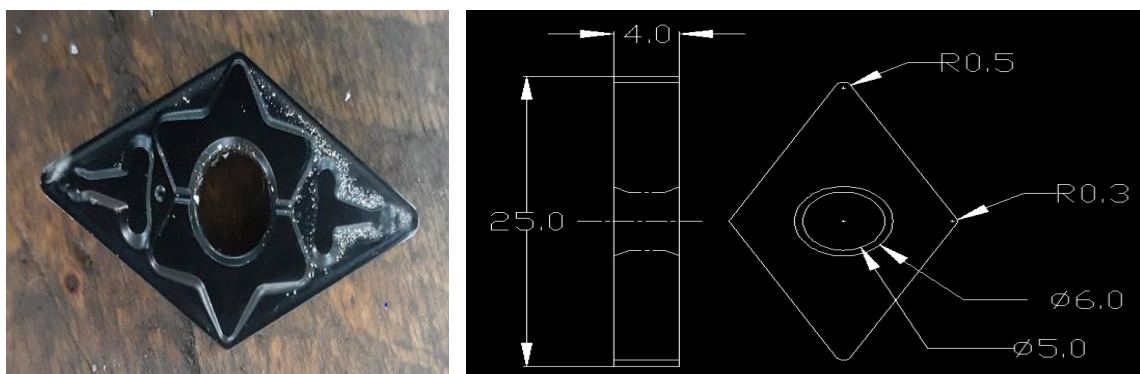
Aluminum oxide coated carbide insert and its geometry
